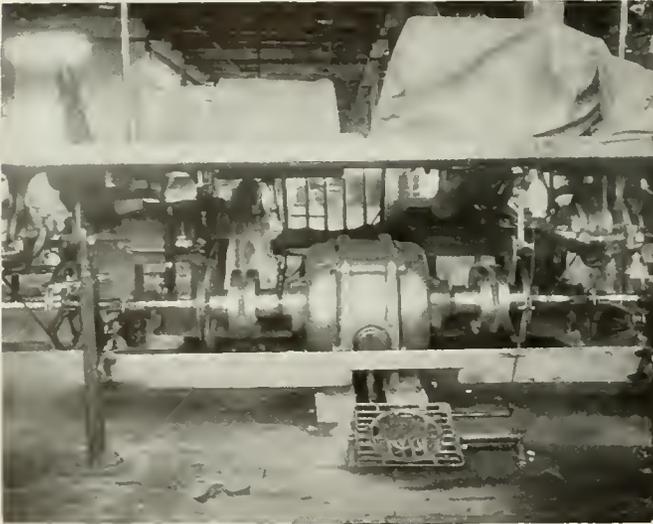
3-h.p., 220-volt, 60-cycle, Three-phase Motor Driving Sewing Machine Table
